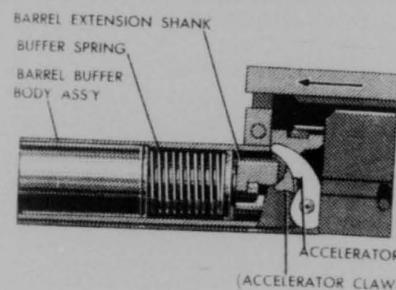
Buffer Spring Compressed and Held By Locked Barrel Extension—Bolt Still Moving Rearward.
